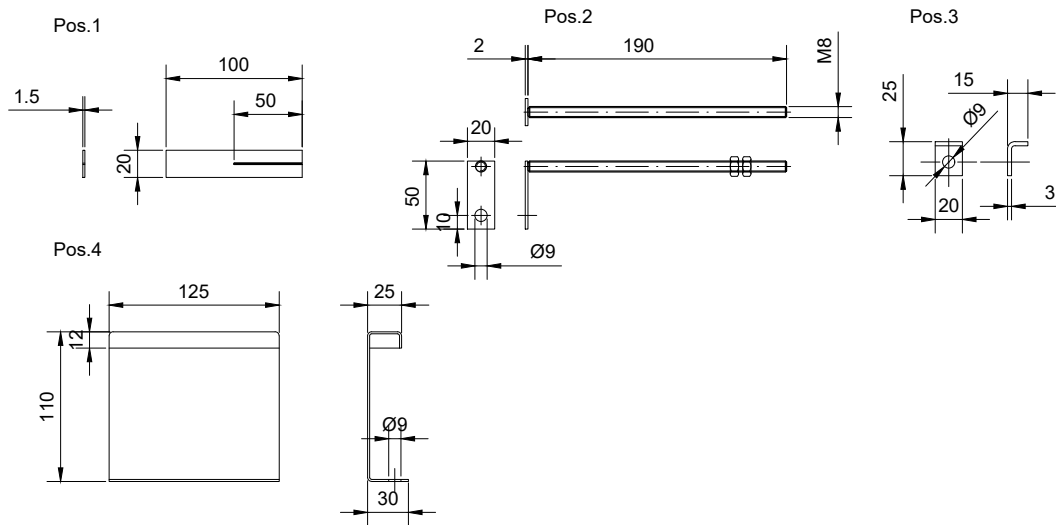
KORA drawing without welding explanation (Source: Product drawing)
